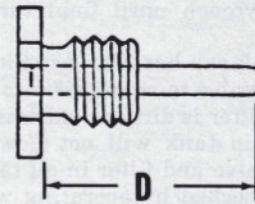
Depth (D) of cam screw pin in cam screw must be 0.553-0.557 when measured as shown above. Adjust pin depth by driving pin in or out of cam screw.
